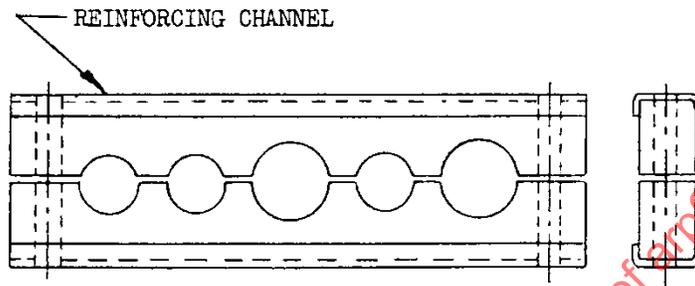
SUPPORT BLOCK CONFIGURATION
